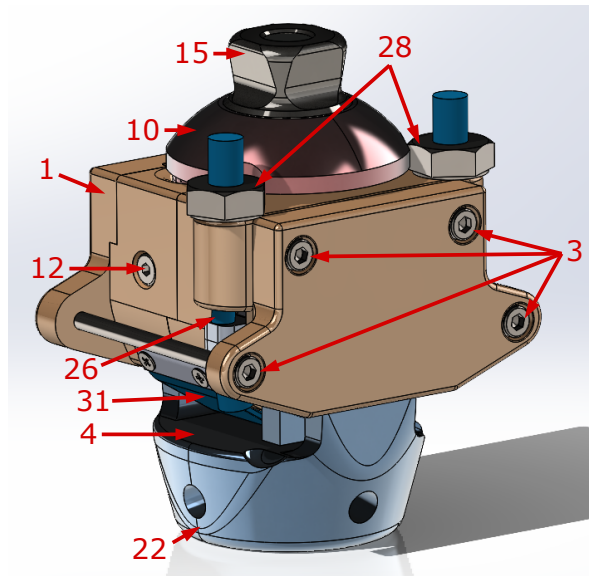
Front view of the complete CAD design. (1) Upper structure, (3) Screws for the upper structure, (4) Lower structure, (10) Top slider, (12) Screw limiting the top slider movement, (15) Male pyramid adapter, (22) Female pyramid adapter, (26) Nylon rope, (28) Perforated screws, (31) Elastic band.
